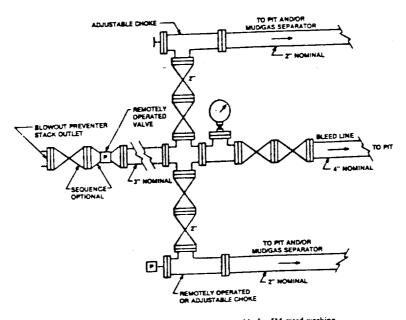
Typical choke manifold assembly for 5M rated working pressure service — surface installation.
